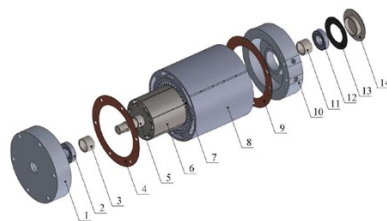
IPMSynRM electrical machine made in Solidworks. 1. front hub. 2. bearing. 3. centering ring. 4. shaft. 5. seal. 6. rotor. 7. stator. 8. cooling body. 9. gasket. 10. centering ring. 11. bearing. 12. rear hub. 13. gasket. 14. pressure pad.
